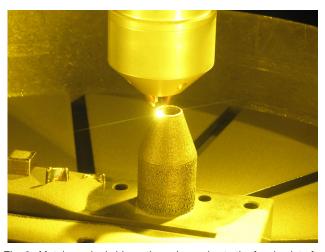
Metal powder is blown through nozzles to the focal point of a laser forming a molten pool which is moved to form the part layer by layer. Courtesy of Balmar.
